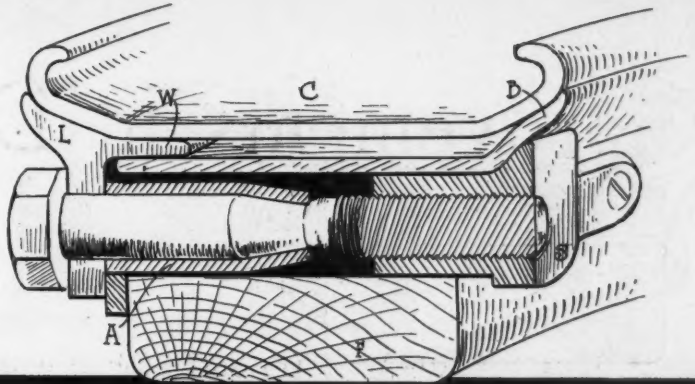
THE UNIVERSAL BAKER BOLTED DEMOUNTABLE: C, RIM; B, FELLOE BAND; L, CLAMP; W, WEDGE; A, SLEEVE; S, STUD PLATE THE SLEEVE A DRAWS THE CLAMP WHEN THE BOLT IS UNSCREWED
